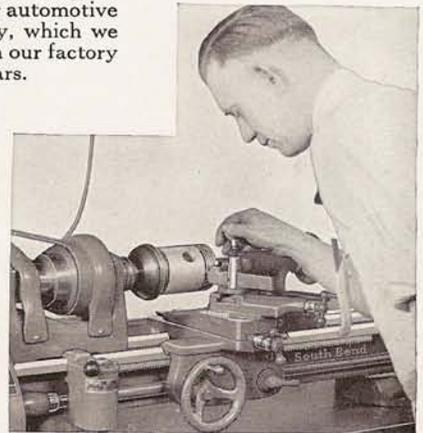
Turning Ring Lands to Size on a Semi-Machined Piston.
